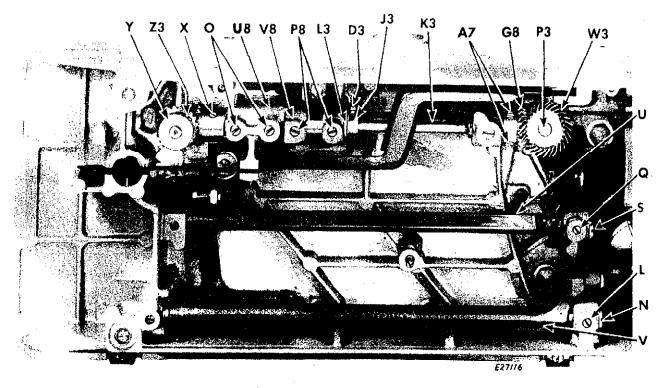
Elimination of End Play or Binding beneath Machine Bed
